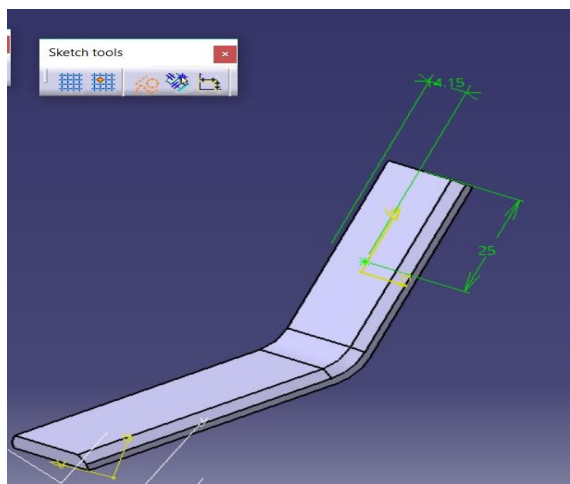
Modified dimensions and 3-D view of tiller blade by using CATIA
